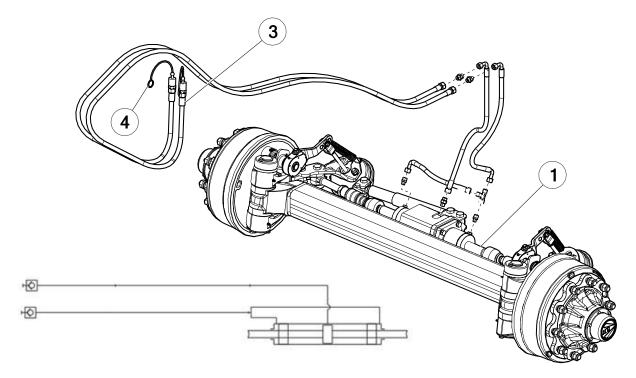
Rear axle hydraulic lock system diagram 1 – hydraulic cylinder, 2 – hydraulic line, 3 – hydraulic quick connector, 4 – hydraulic plug
